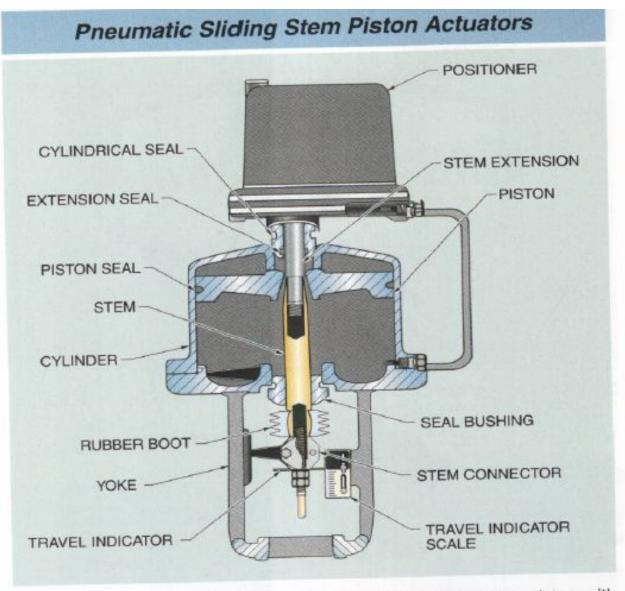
A pneumatic sliding stem piston actuator uses a piston with balancing air pressures to move a valve stem. High air pressures can be used to overcome large forces on the valve plug.
